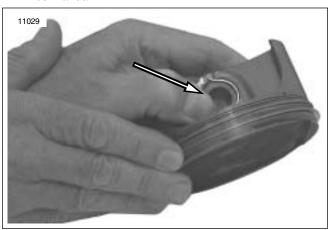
Piston Pin Clip Hook (piston removed from connecting rod for photo clarity)
